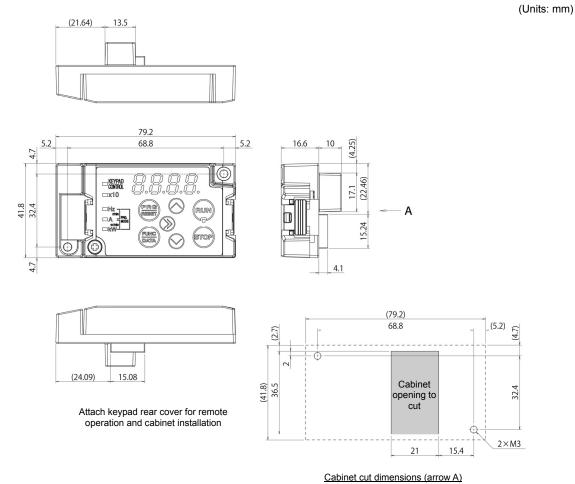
Attachment Screw Positions and the Dimensions of the Cabinet to Cut
